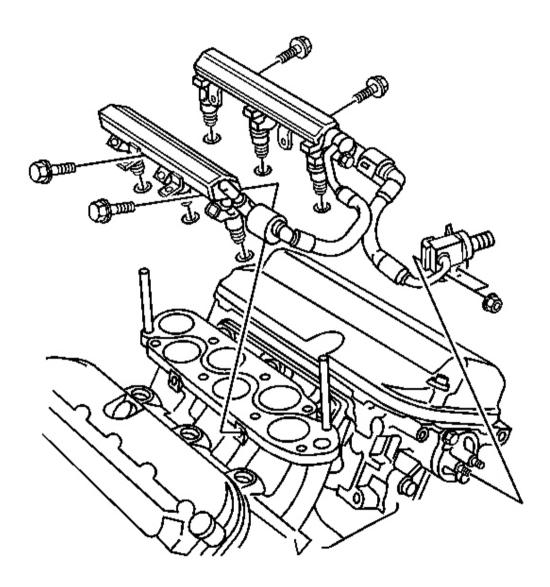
View Of Bolts Courtesy of GENERAL MOTORS CORP.
